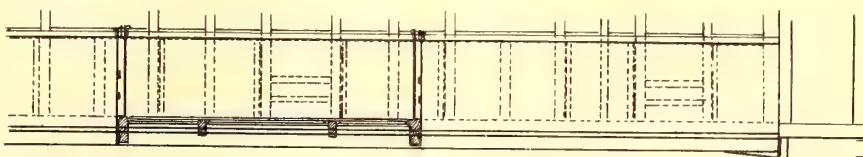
PLATE GIRDER CONSTRUCTION OF A PRUSSIAN VESTIBULED CAR
